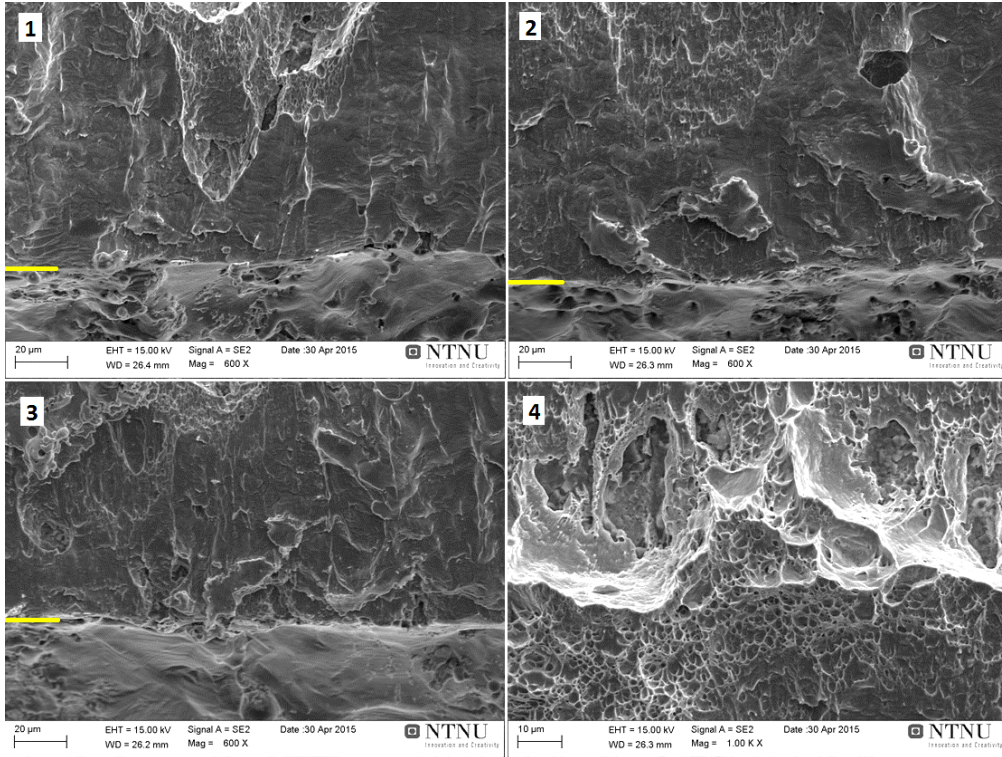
Sample B, test 3, clad section of specimen. The fracture surface is above the yellow line. The areas 1-4 are indicated in Figure 74 above.
